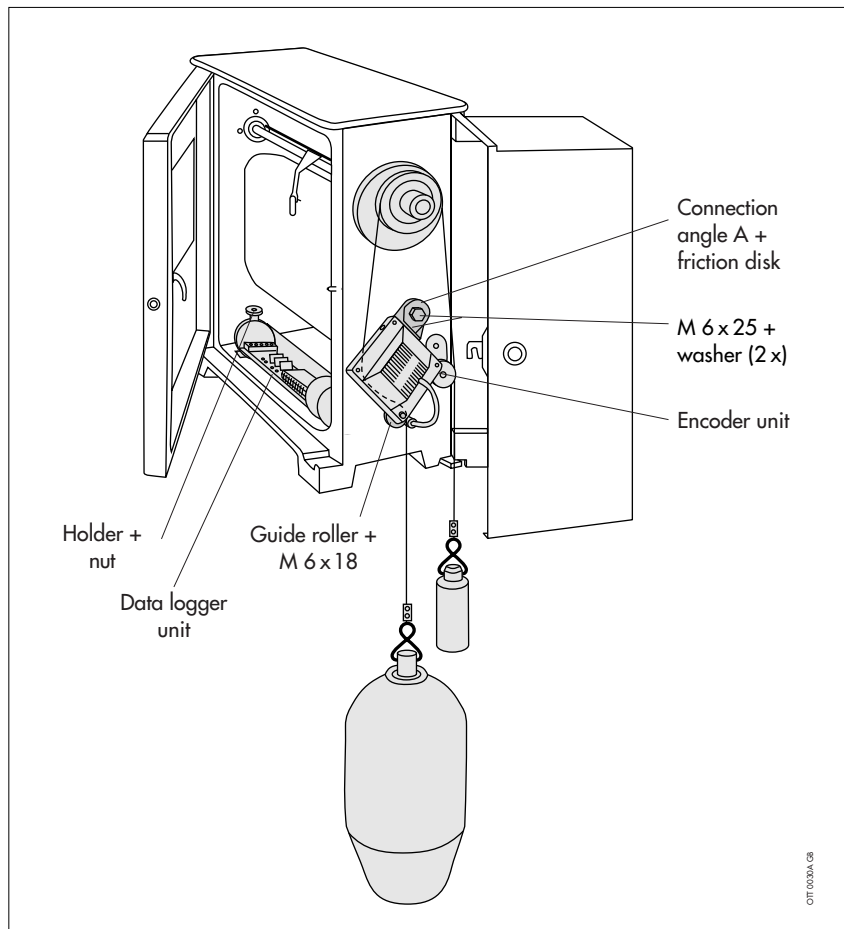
Example of attachment to OTT R20 Strip-Chart Recorder
